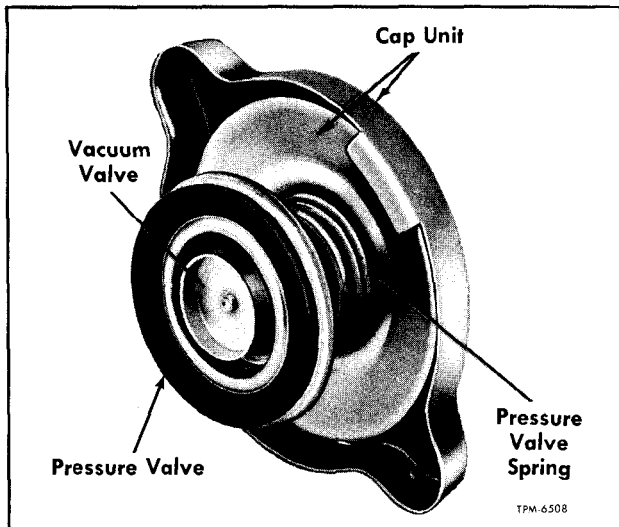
Combination Pressure Relief Valve and Filler Cap
